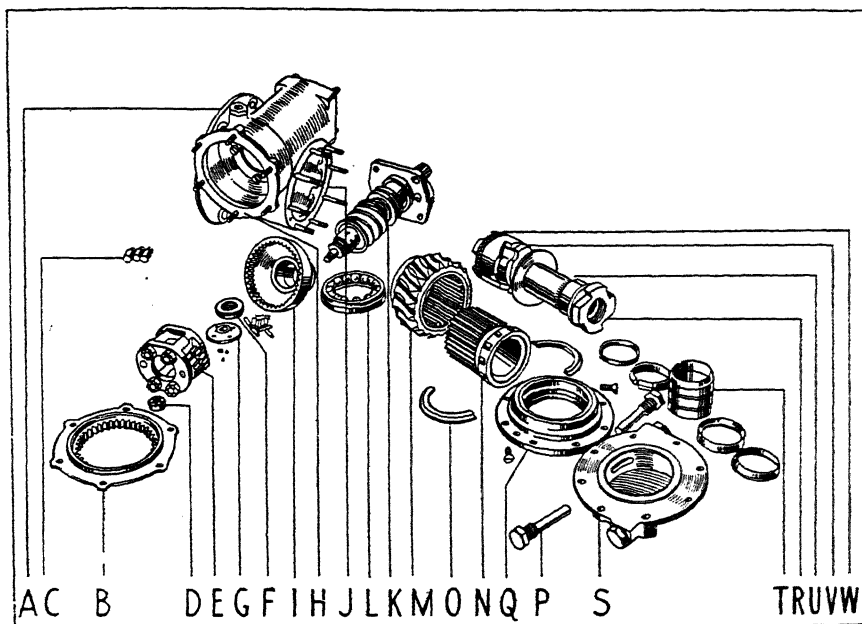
EXPLODED VIEW OF ARMSTRONG SIDDELEY GEAR-BOX
